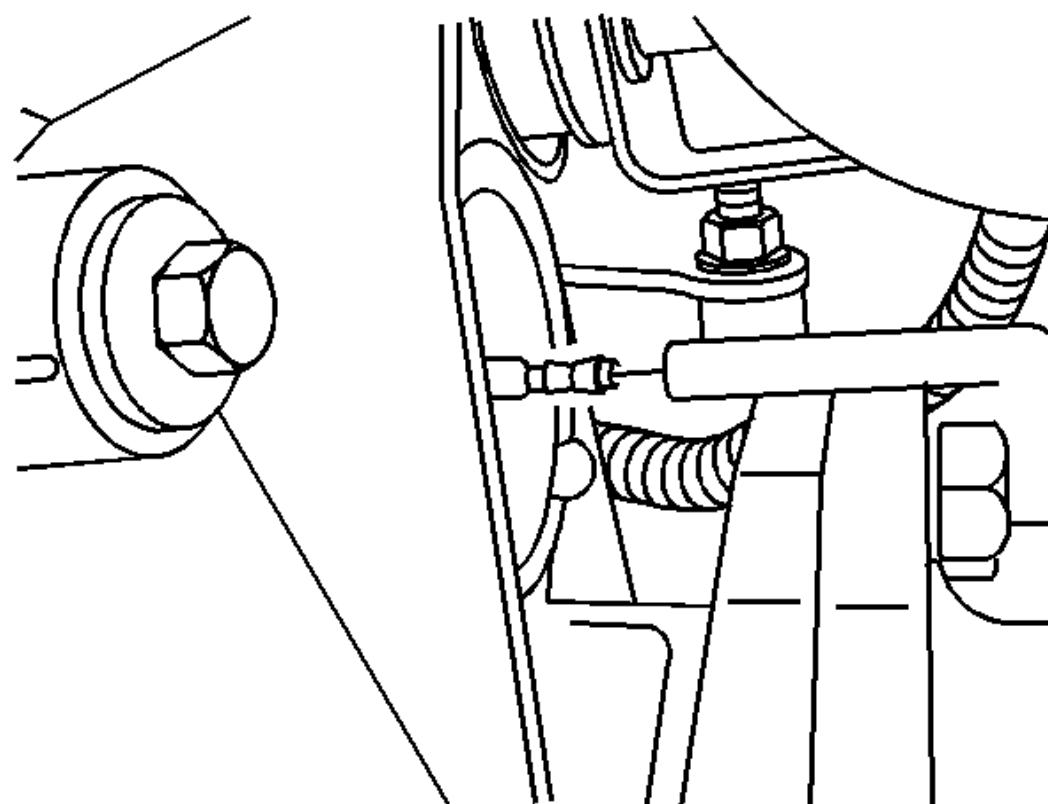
View Of Vent Hose To Differential Carrier Assembly
